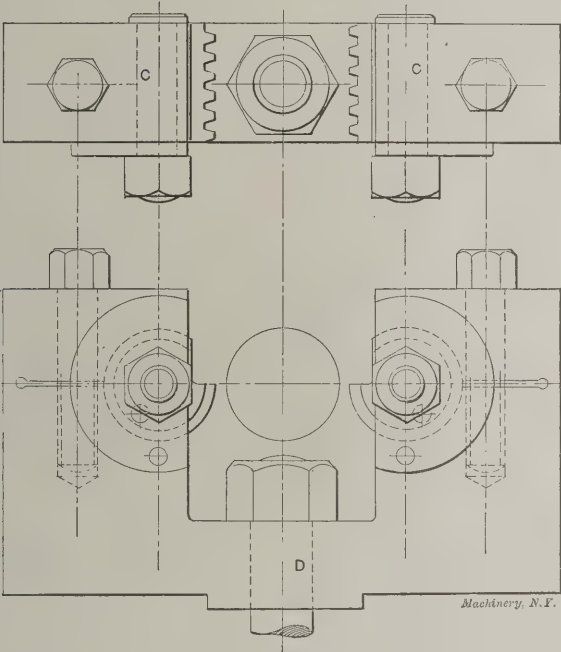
Double Tool-post with Circular-formed Threading Tool.
